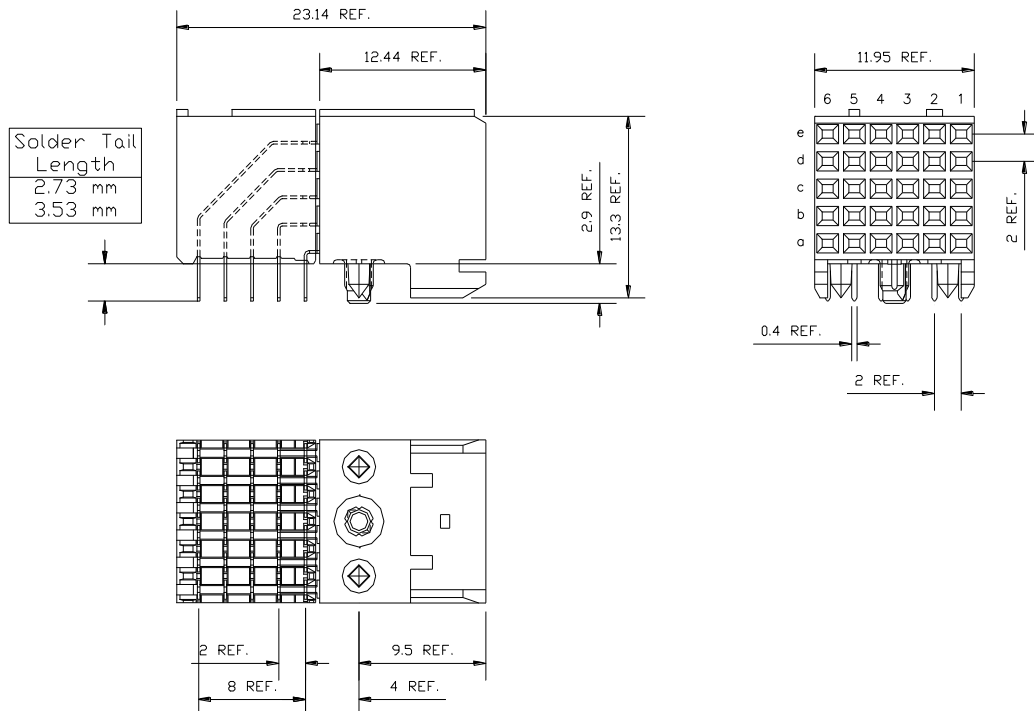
Right angle solder to board 5-row signal receptacle (all dimensions in mm)
